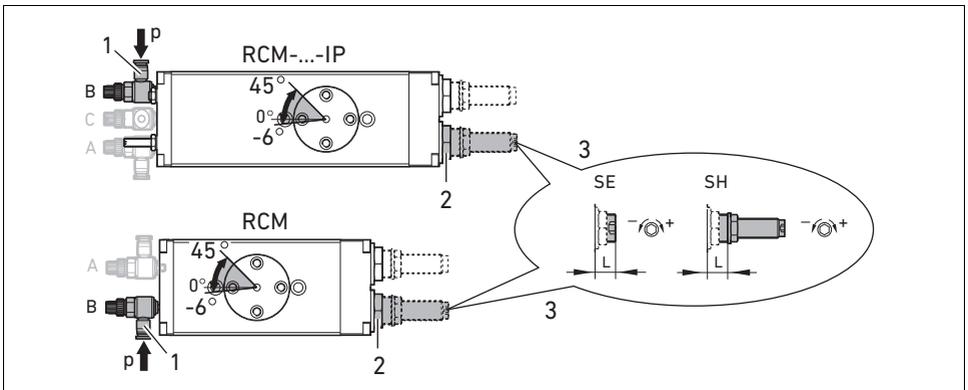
Adjusting the end position 0° (-6° to 45°)
